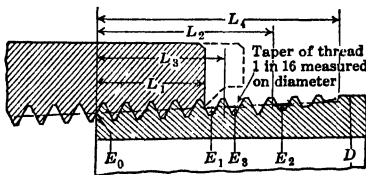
Dimensions of American standard pipe thread. (See also Table 10.)
